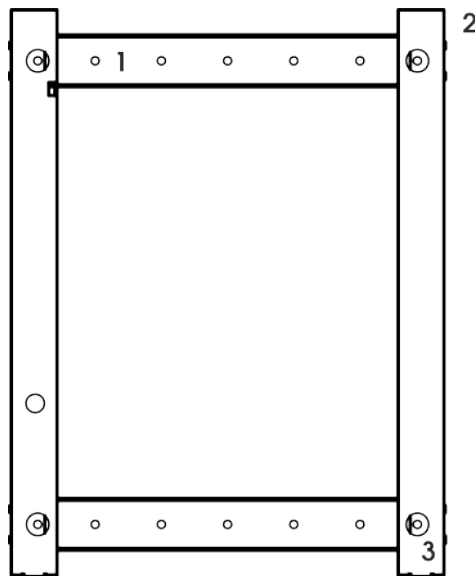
Mounting pad of the indoor unit for wall mounting
